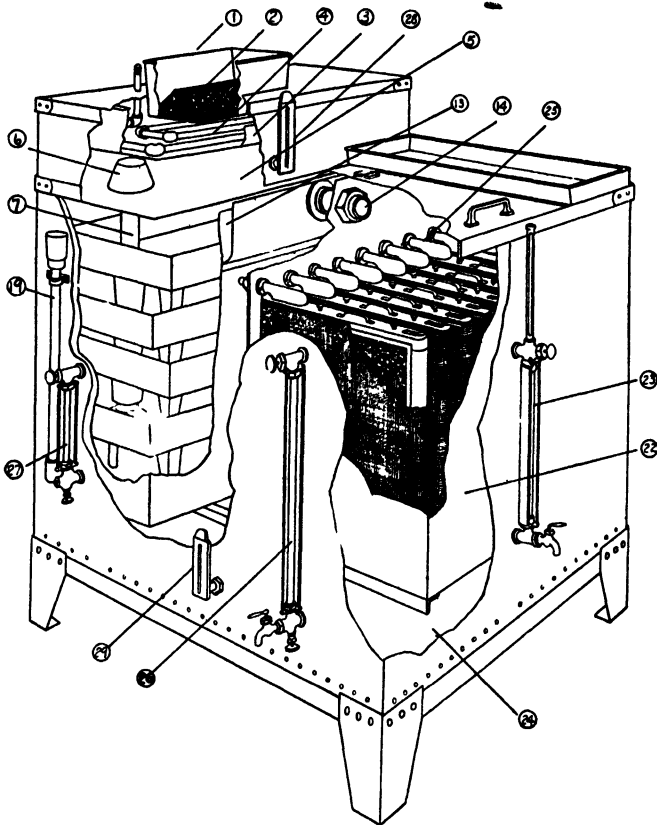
Drawing Showing Interior Construction of Power Plant Oil Filter (See List of Parts under Fig 103)
